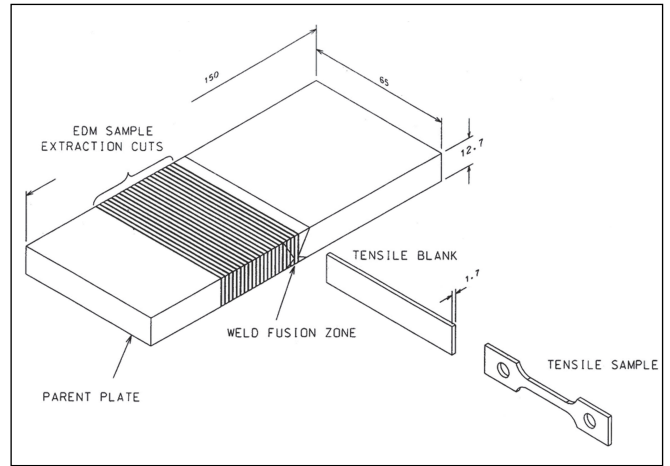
Extraction layout for HAZ samples removed from Plate 2A. Dimensions are in mm.
